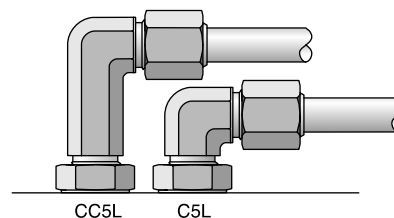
Long elbow (CC5L) stacks above regular elbow (C5L)
